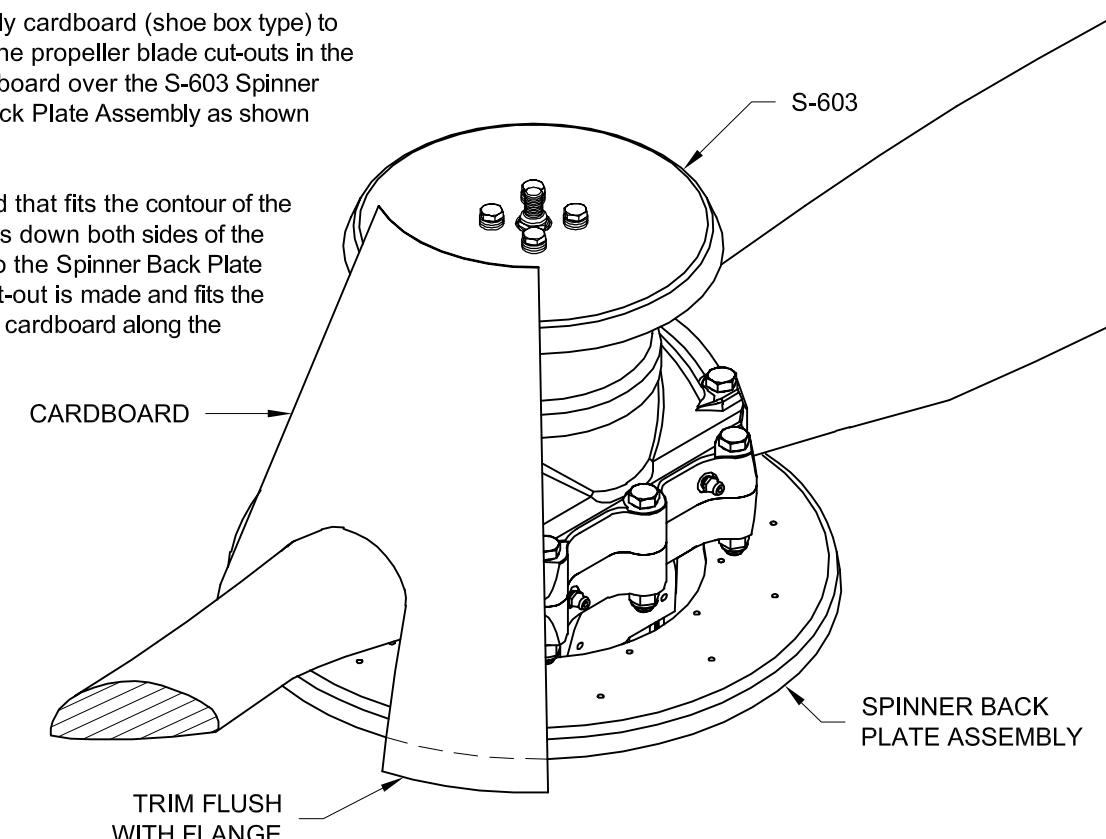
MAKING A CARDBOARD TEMPLATE
